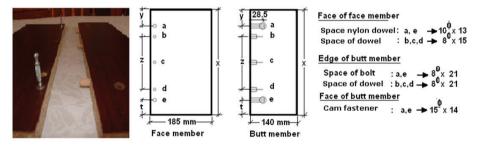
Experiment specimens' drilling plans and measures (mm).
